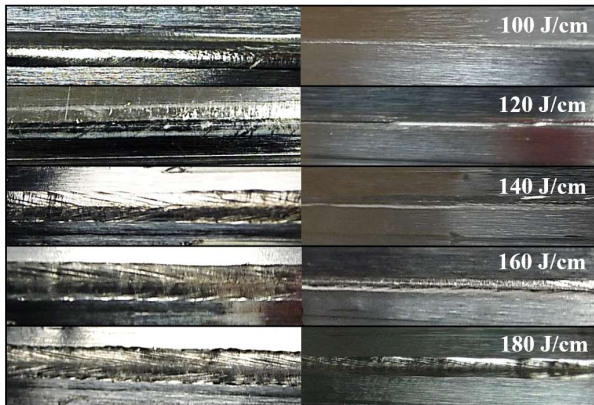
Seam (left) and root (right) of the welds at 6 m/min
